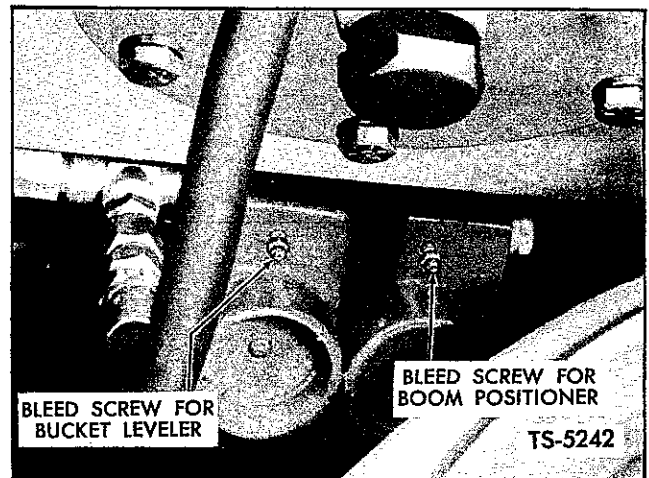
Bleed Boom Positioner Lines at Control Valve
